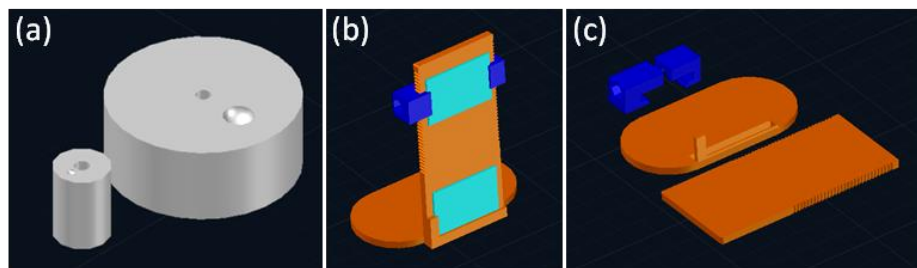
Three dimensional drawings of (a) the wheels and (b),(c) the motor's stand
